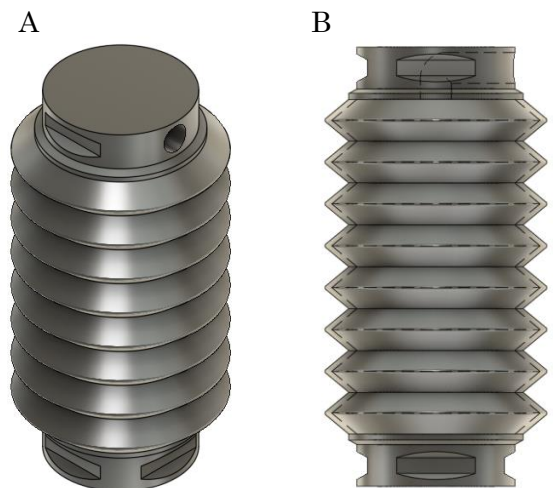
Oblique view (A) and front view (B) of bellows actuator
